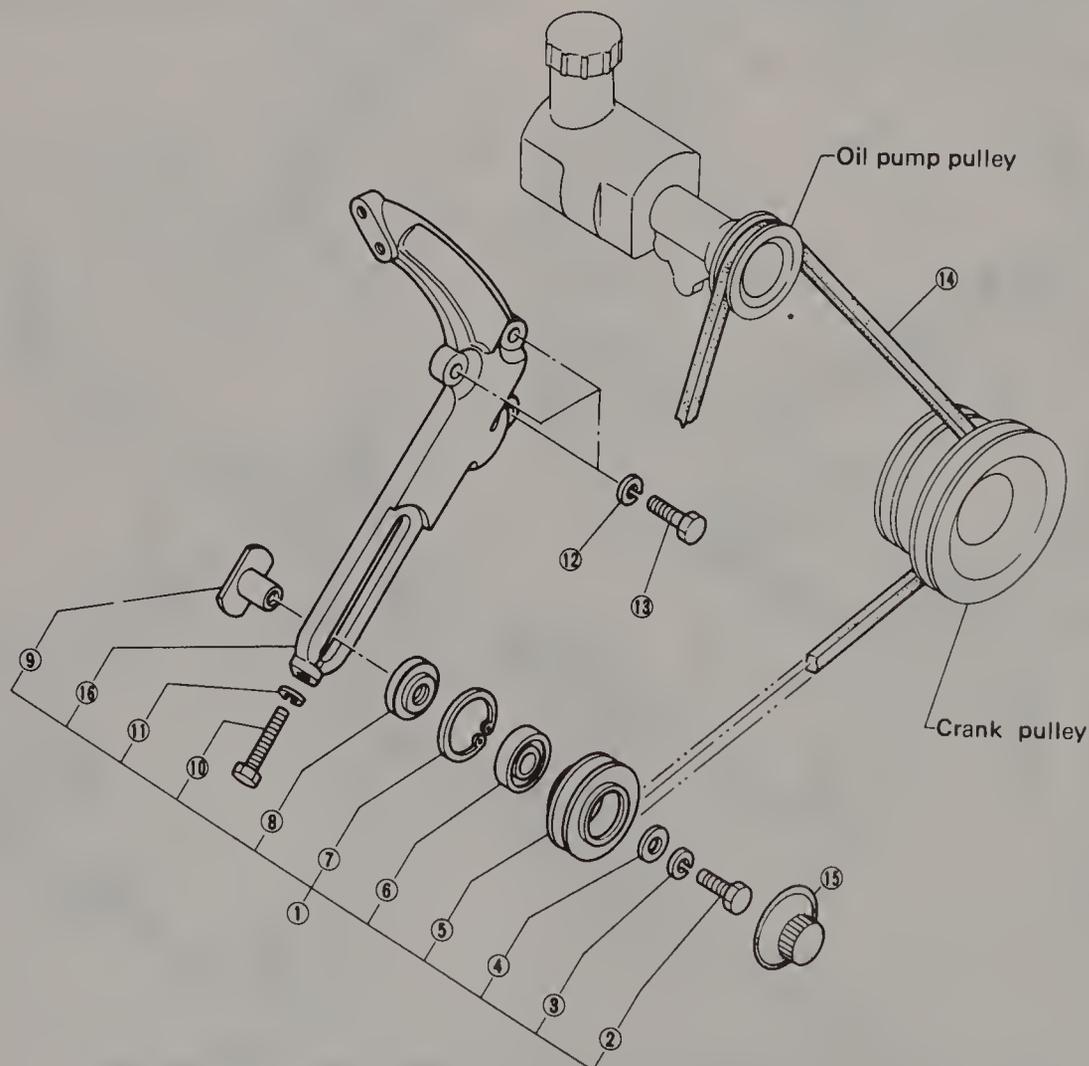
Power steering idler pulley components – exploded view (Sec 23)
